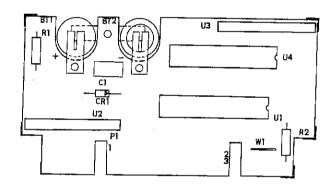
A5 A/D and Ohms Converter PCB Assembly (cont)
